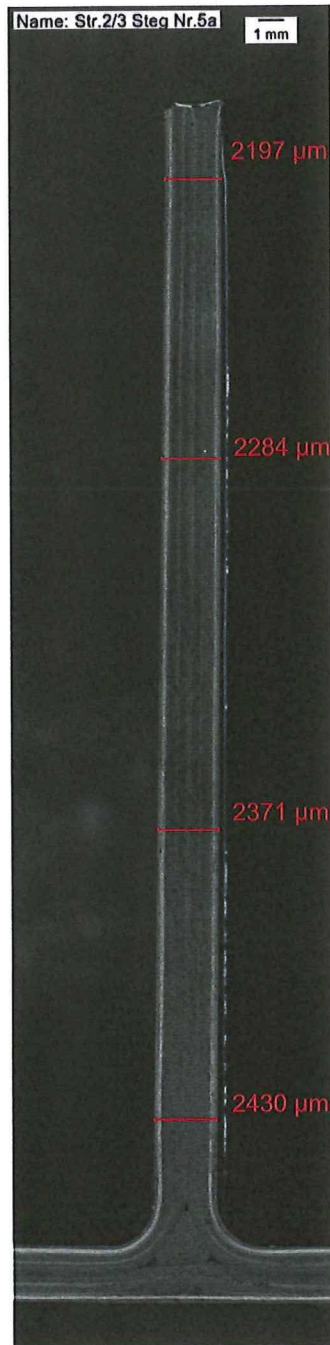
Cross section of panel 6 stringer 3b skin
